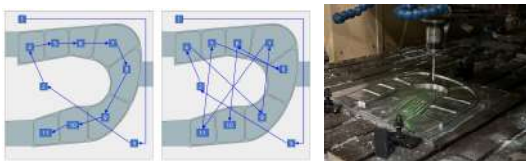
Machining path and Form error evaluation for thin-shape part by utilizing on-machine measurement
